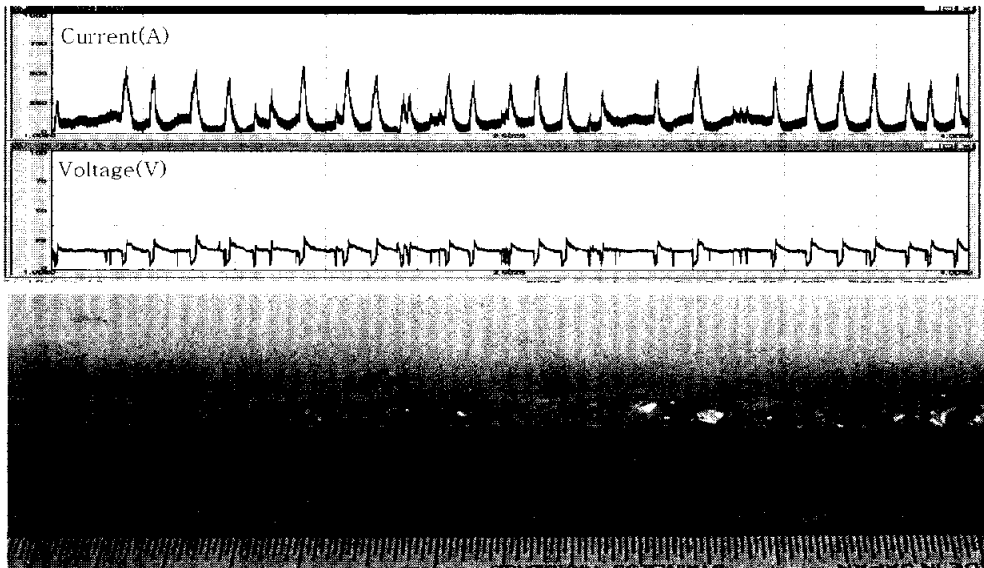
Waveforms and bead shape at welding current 129A
